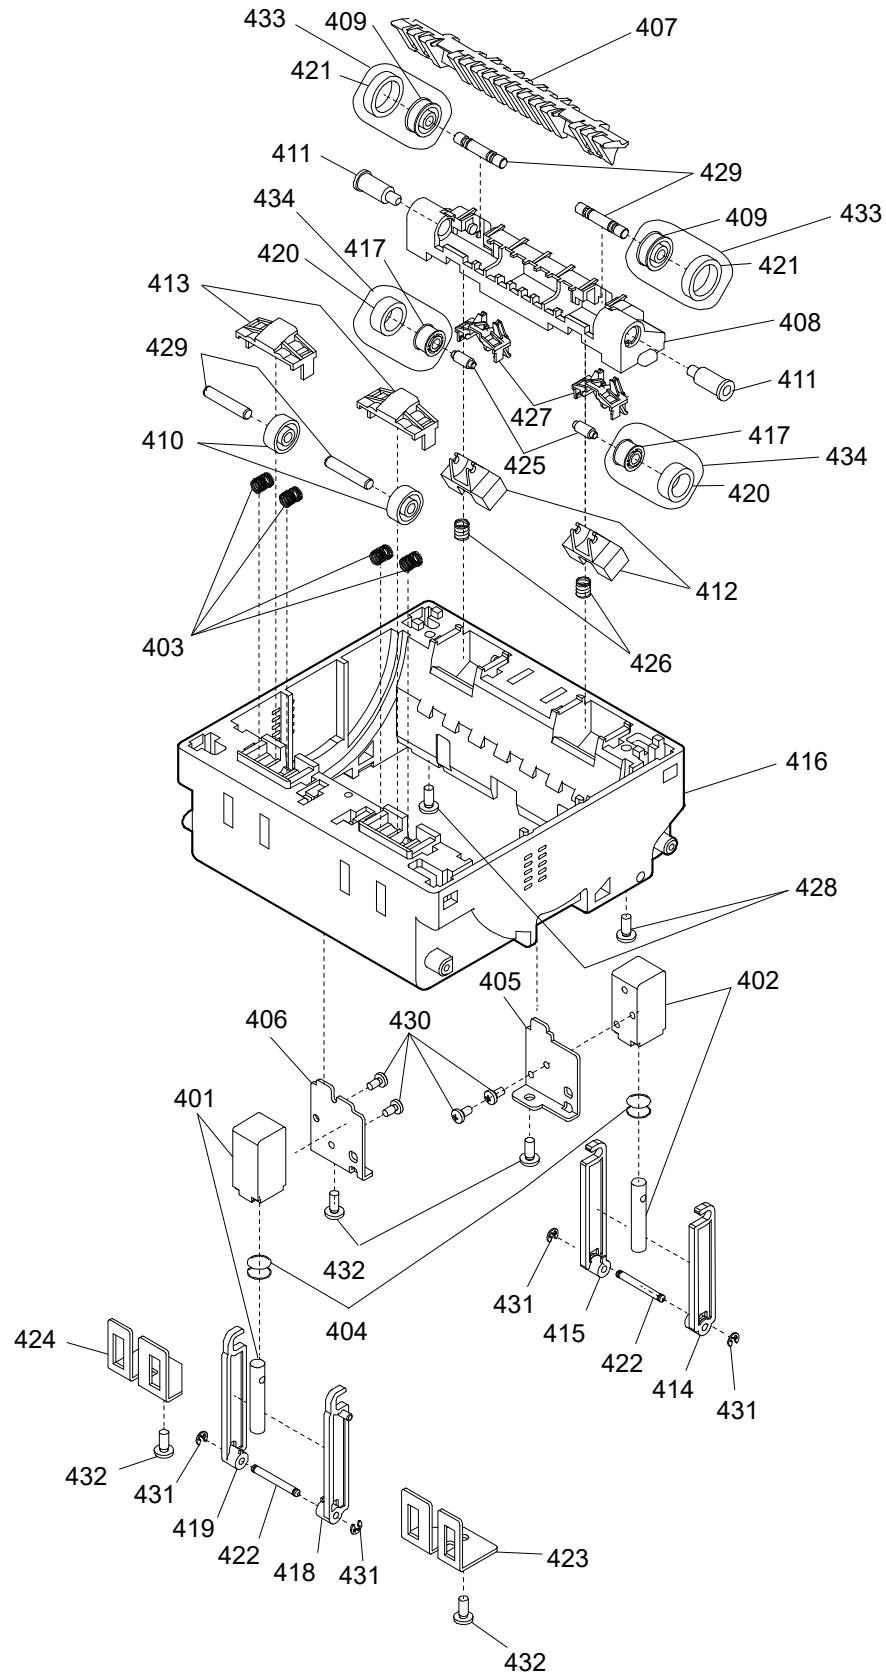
PUB-7/11 Transport Unit Exploded View
